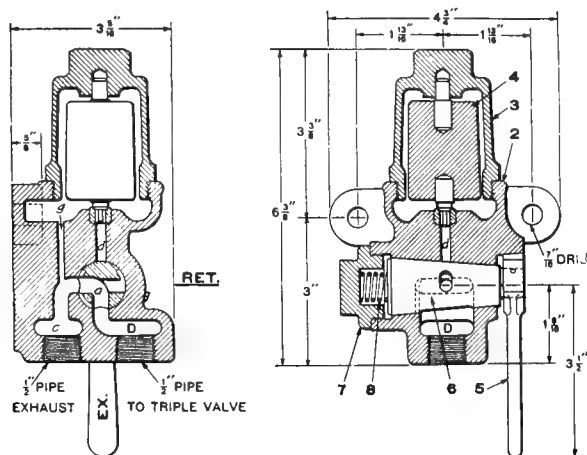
Weight Type Pressure Retaining Valve for 12 in., 14 in. and 16 in. Brake Cylinders.
